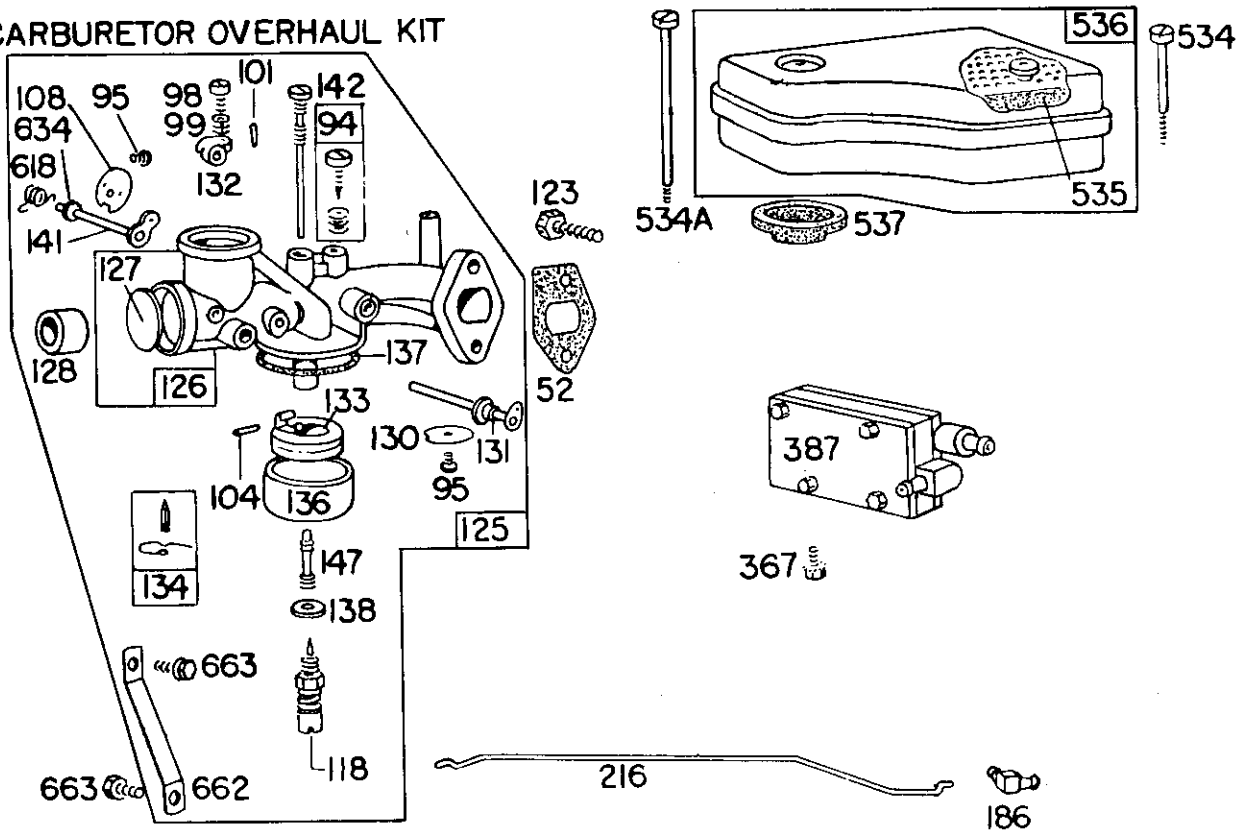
A. MODEL 812 (BRIGG'S & STRATTON ENGINE ASSEMBLY 191707-5650-01)
